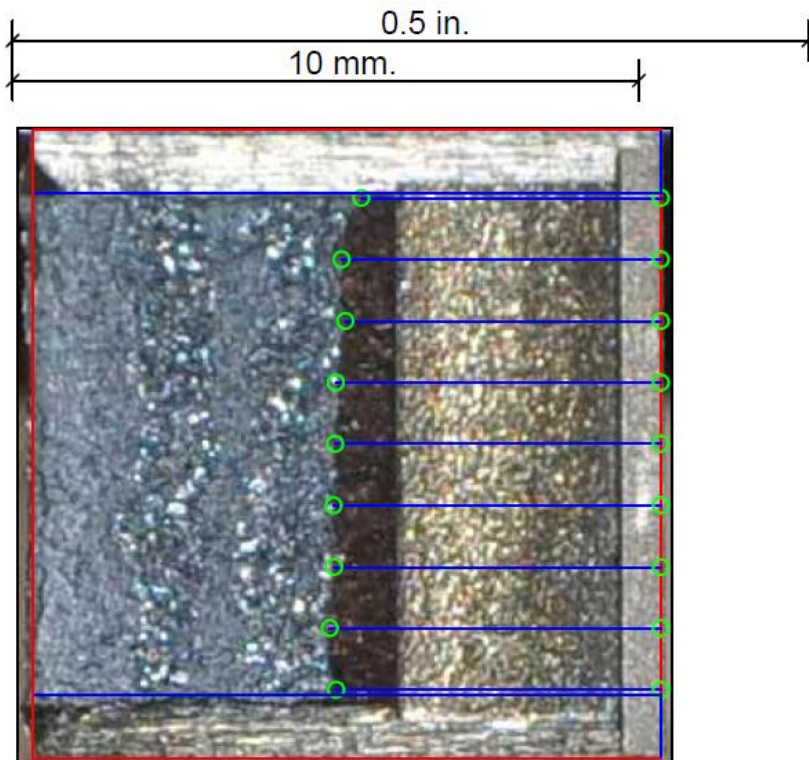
Specimen B18' Fracture Surface
